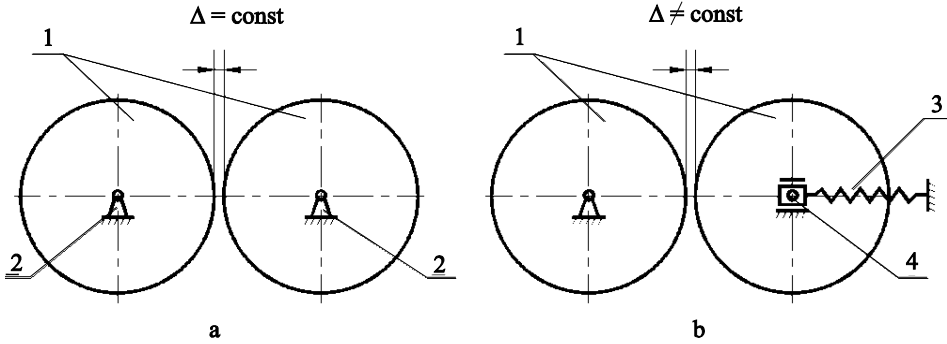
Rollers for waste treatment with constant (a) and alternating (b) gap: 1 – rolls; 2 – fixed support; 3 – elastic element; 4 – slider [own study]
